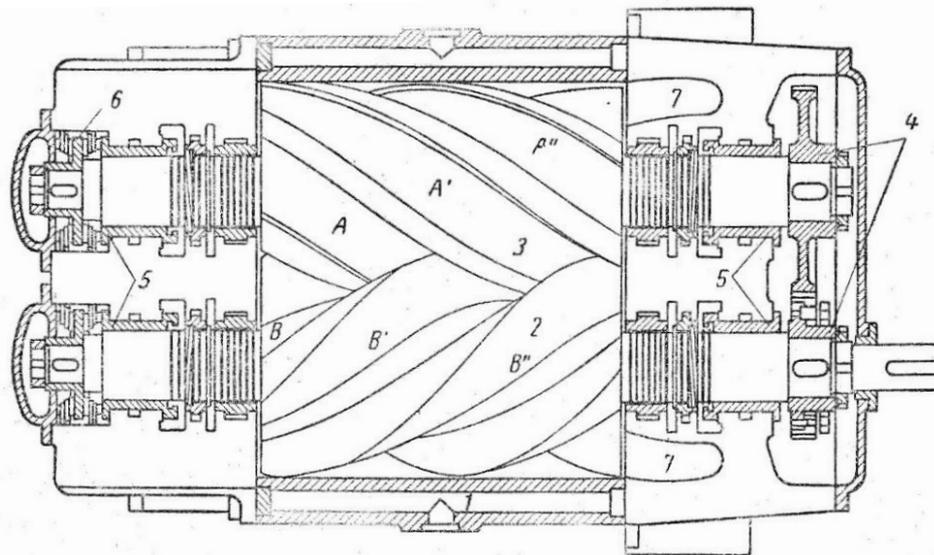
Twin-rotor screw compressor: 1 – case; 2 – driving rotor; 3 – driven rotor; 4 – gears; 5 – support bearings; 6 – thrust bearings; 7 – discharge window
